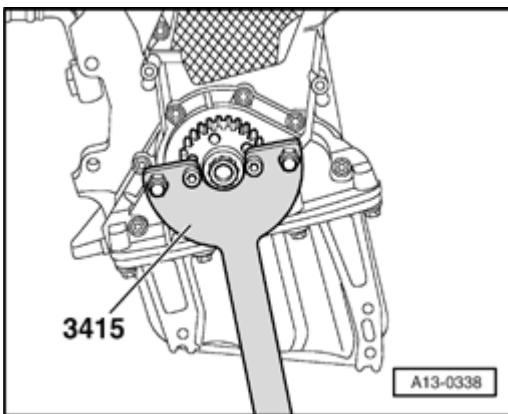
Removing And Installing Crankshaft Toothed Belt Sprocket
